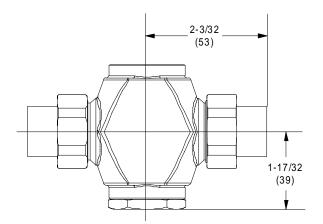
1/2 in. Normally Closed Union Sweat VG7000 Series Bronze Control Valve Dimensions, in. (mm)
